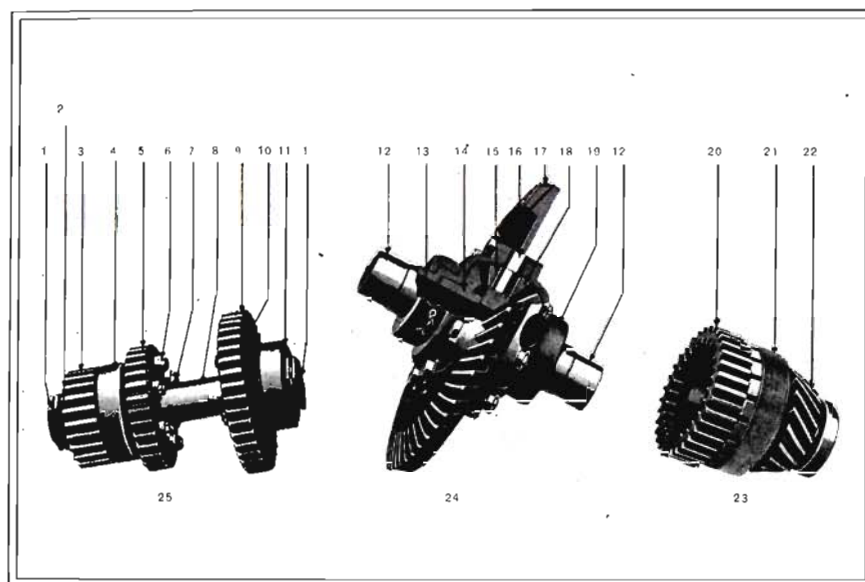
Countershaft, Differential Assembly and Direct Drive Gear
